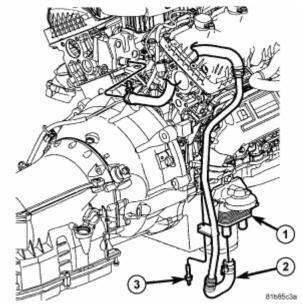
Removing/Installing Oil Cooler & Coolant Hoses Courtesy of CHRYSLER LLC
